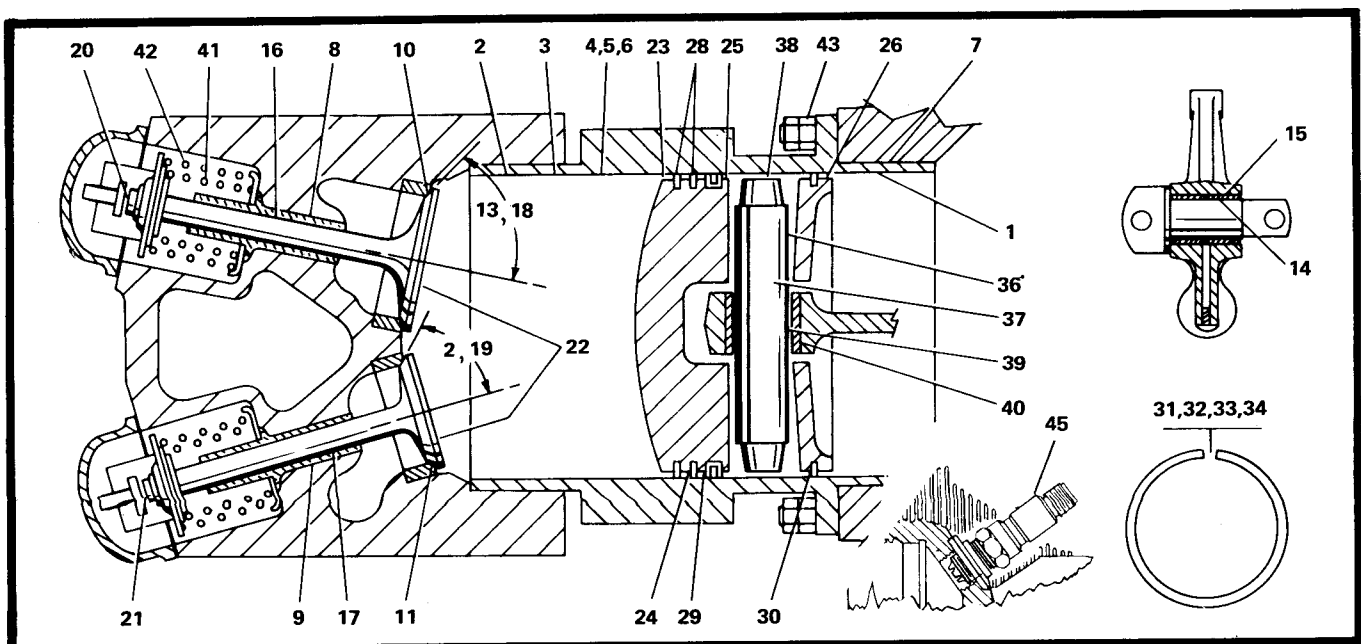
Cylinder and Piston Limits (Refer to Table XII).
